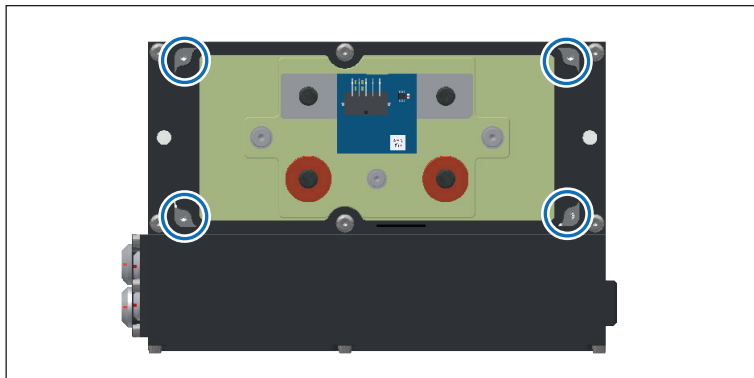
HV BM 1.2, housing open, M3 threaded holes marked
